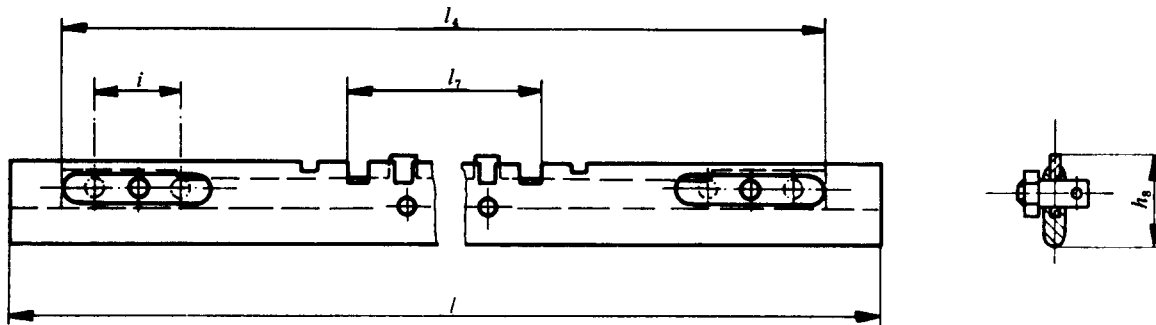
Combination FIG. 6 — Assemblage Фиг. 6 — Сборка
